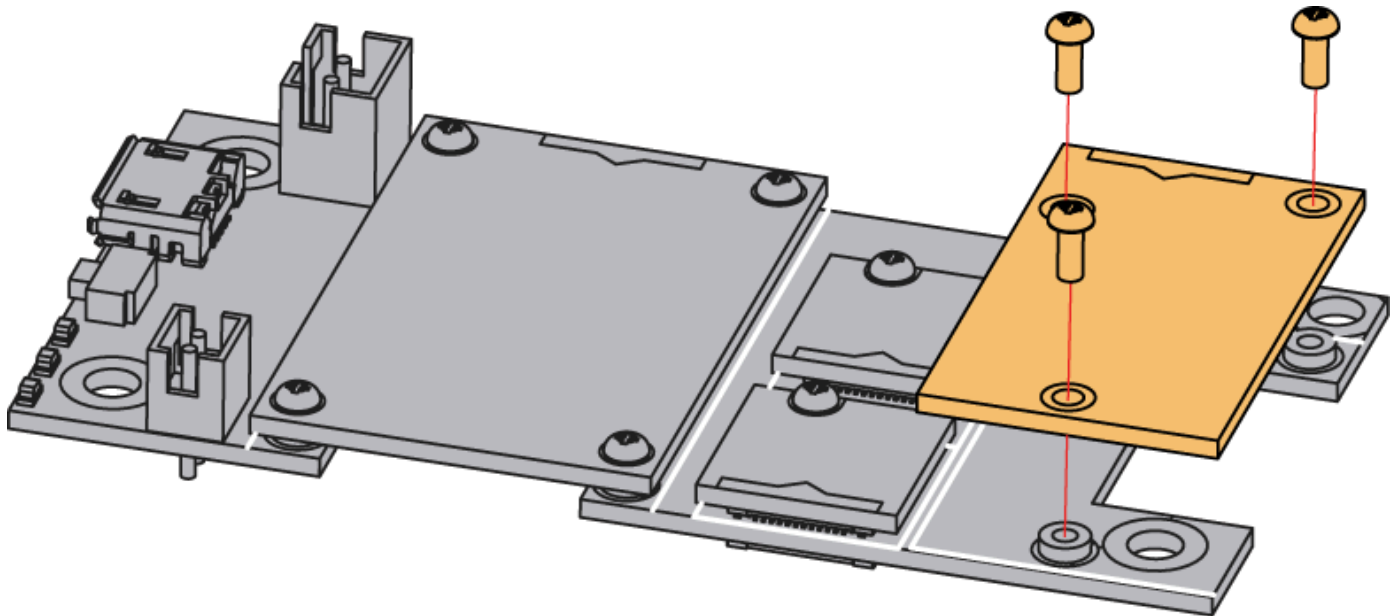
RAK14001 mounting mechanism on a WisBlock Base module
